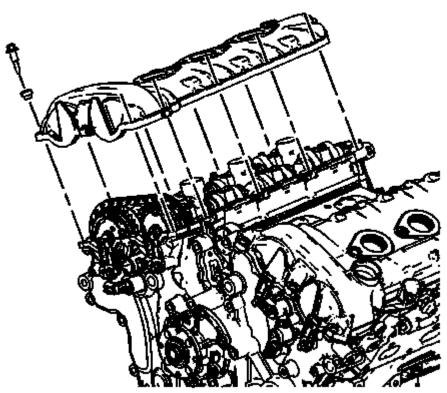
Removing & Installing Camshaft Cover Courtesy of GENERAL MOTORS COMPANY
